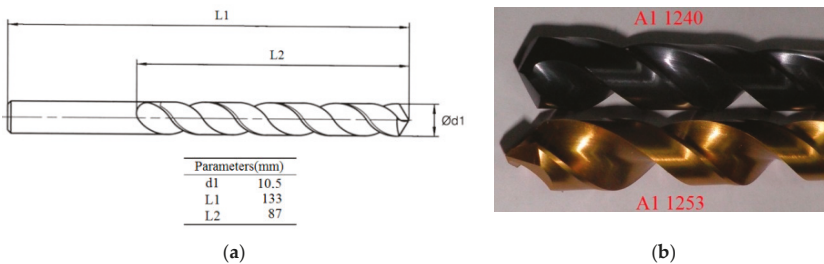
(a) Drill tool geometry and dimensions; (b) Materials and uses of the tools: A11240 is composed of High-Speed Steel and recommended for titanium, steel, and stainless steel and A11253 is composed of High-Speed Steel coated with titanium nitride and recommended for steel, stainless steel, titanium, aluminium alloys, and copper alloys [64].
